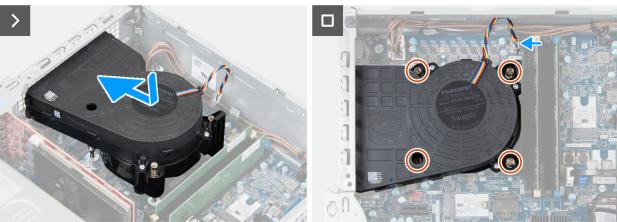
Installing the processor fan and heat-sink assembly (Dell Pro Slim Plus QBS1250)
